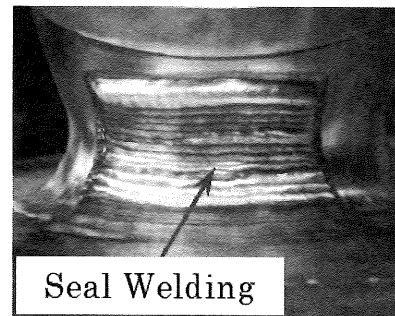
Appearance of TIG seal welding on the CRD stub-tube welding portion
